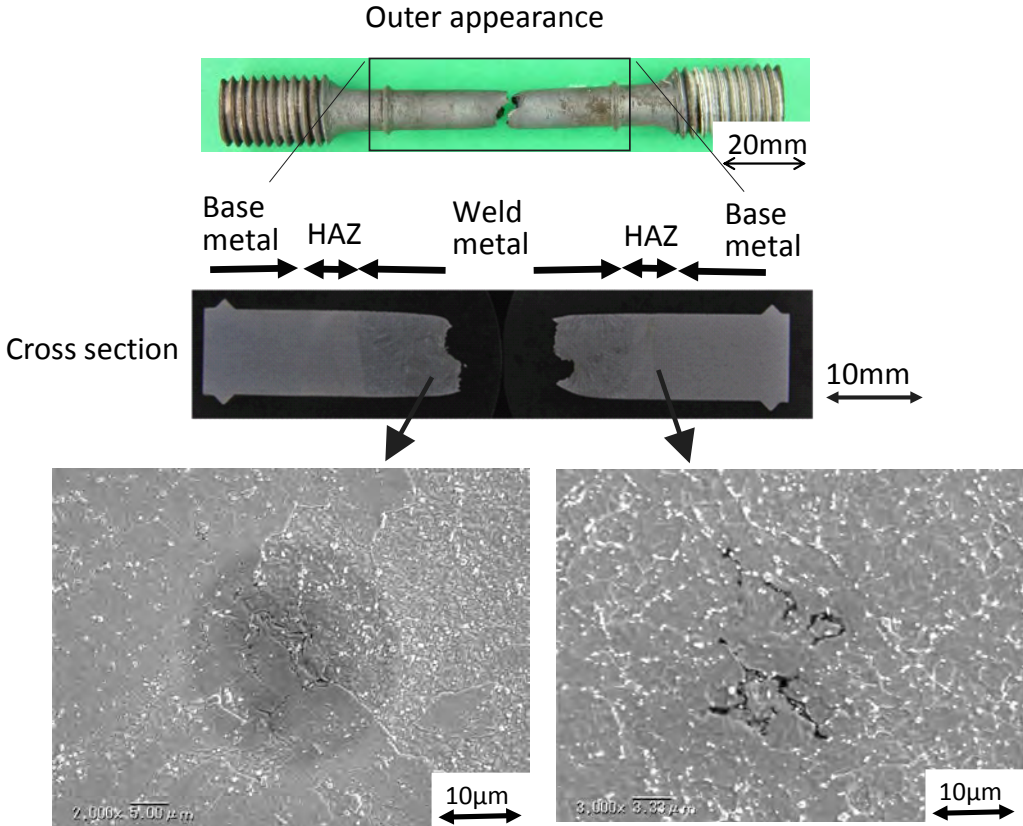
Ruptured specimen of welded joint (Intrados, 650°C, 50MPa)
